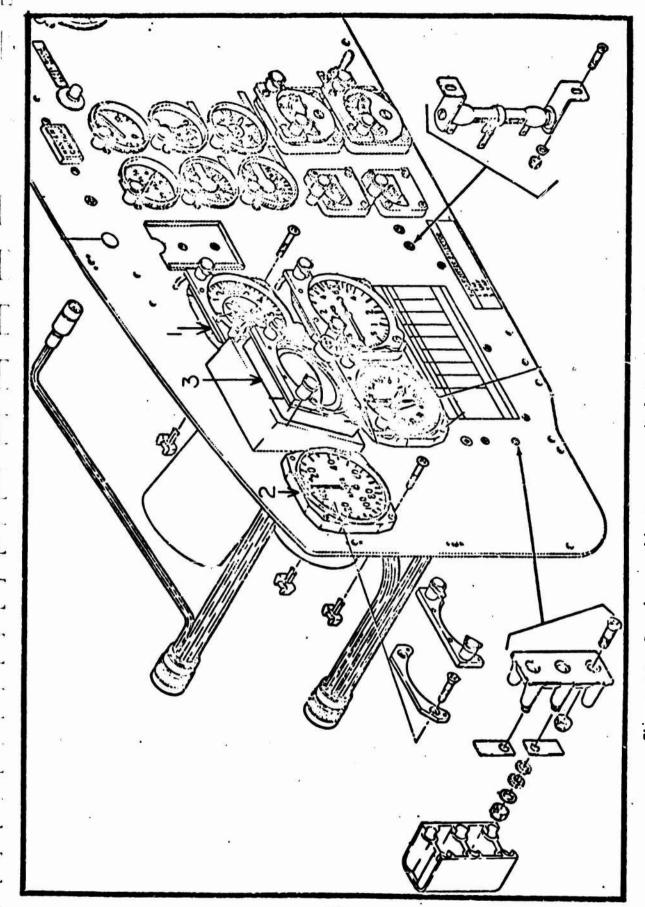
Panel Assembly, Instrument (Left Hand Section)
